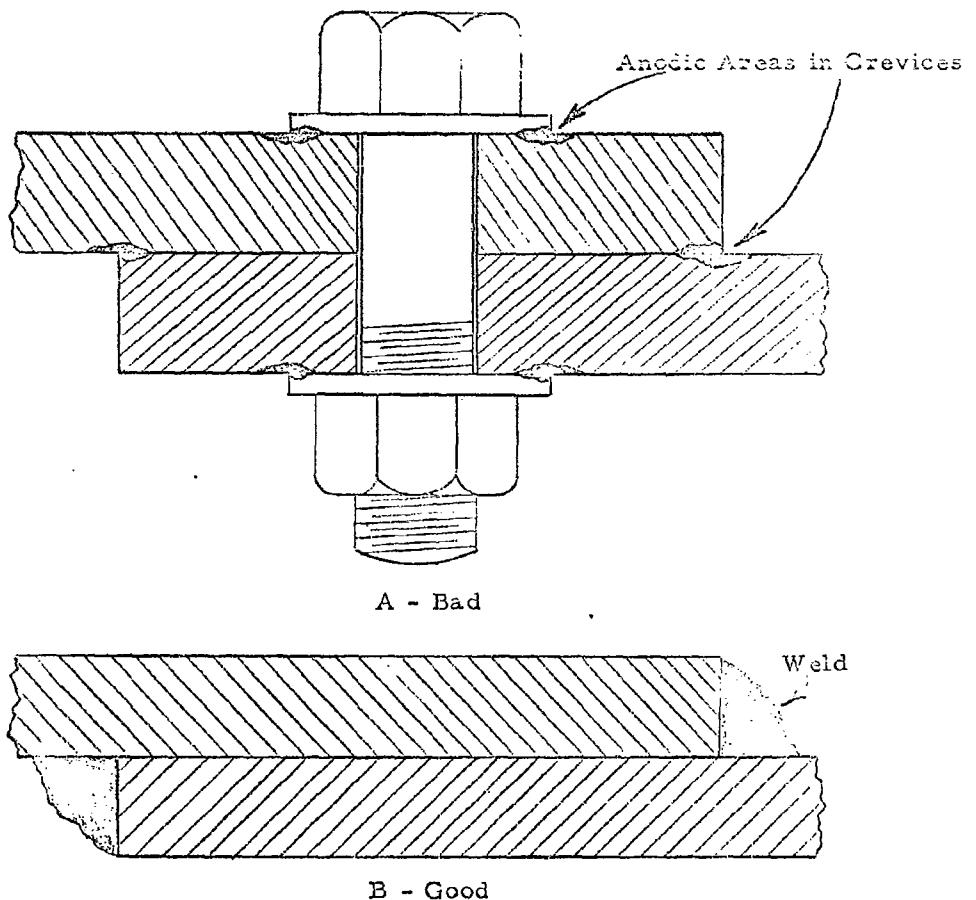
CORROSION PREVENTION BY USAGE OF WELDING.\
